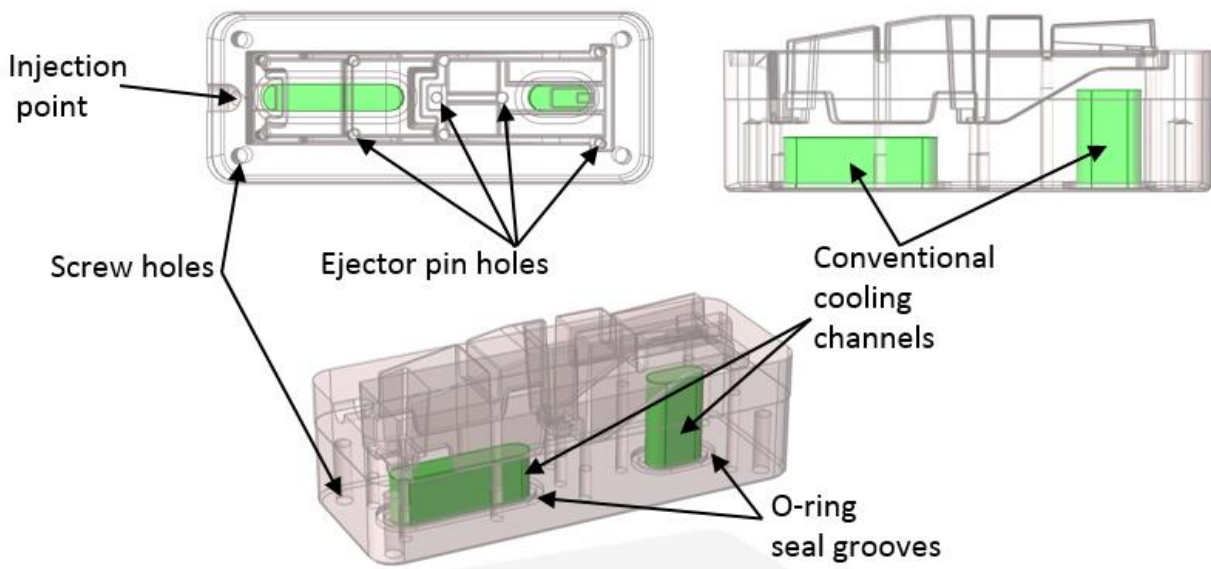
CAD design of the conventionally manufactured insert with cooling channels.
